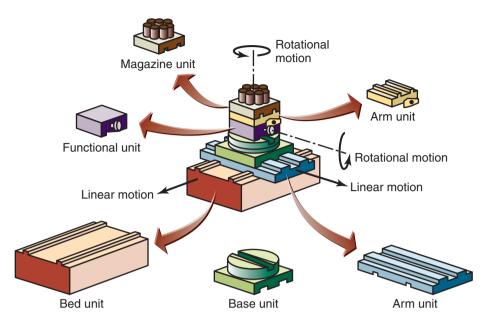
Schematic illustration of the assembly of different components of a reconfigurable machining center. *Source:* After Y. Koren.
